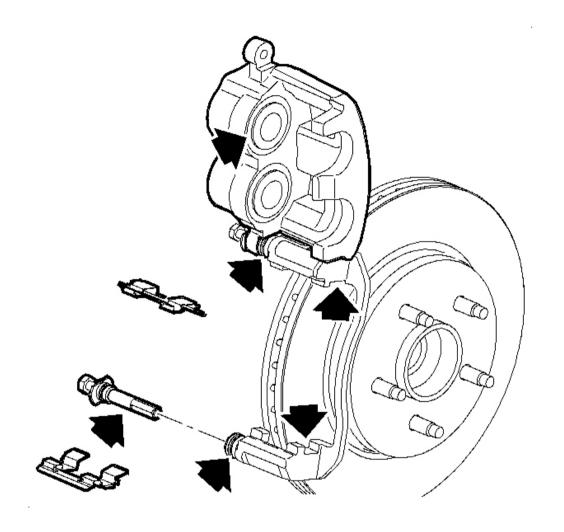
Removing/Installing Brake Pad Retainers From Caliper Bracket Courtesy of GENERAL MOTORS CORP.
